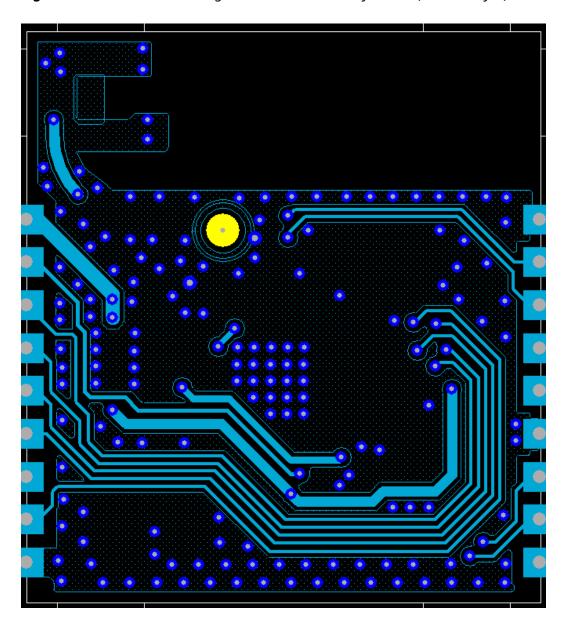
EPAD trace routing reference for the 2-layer PCB (bottom layer)
